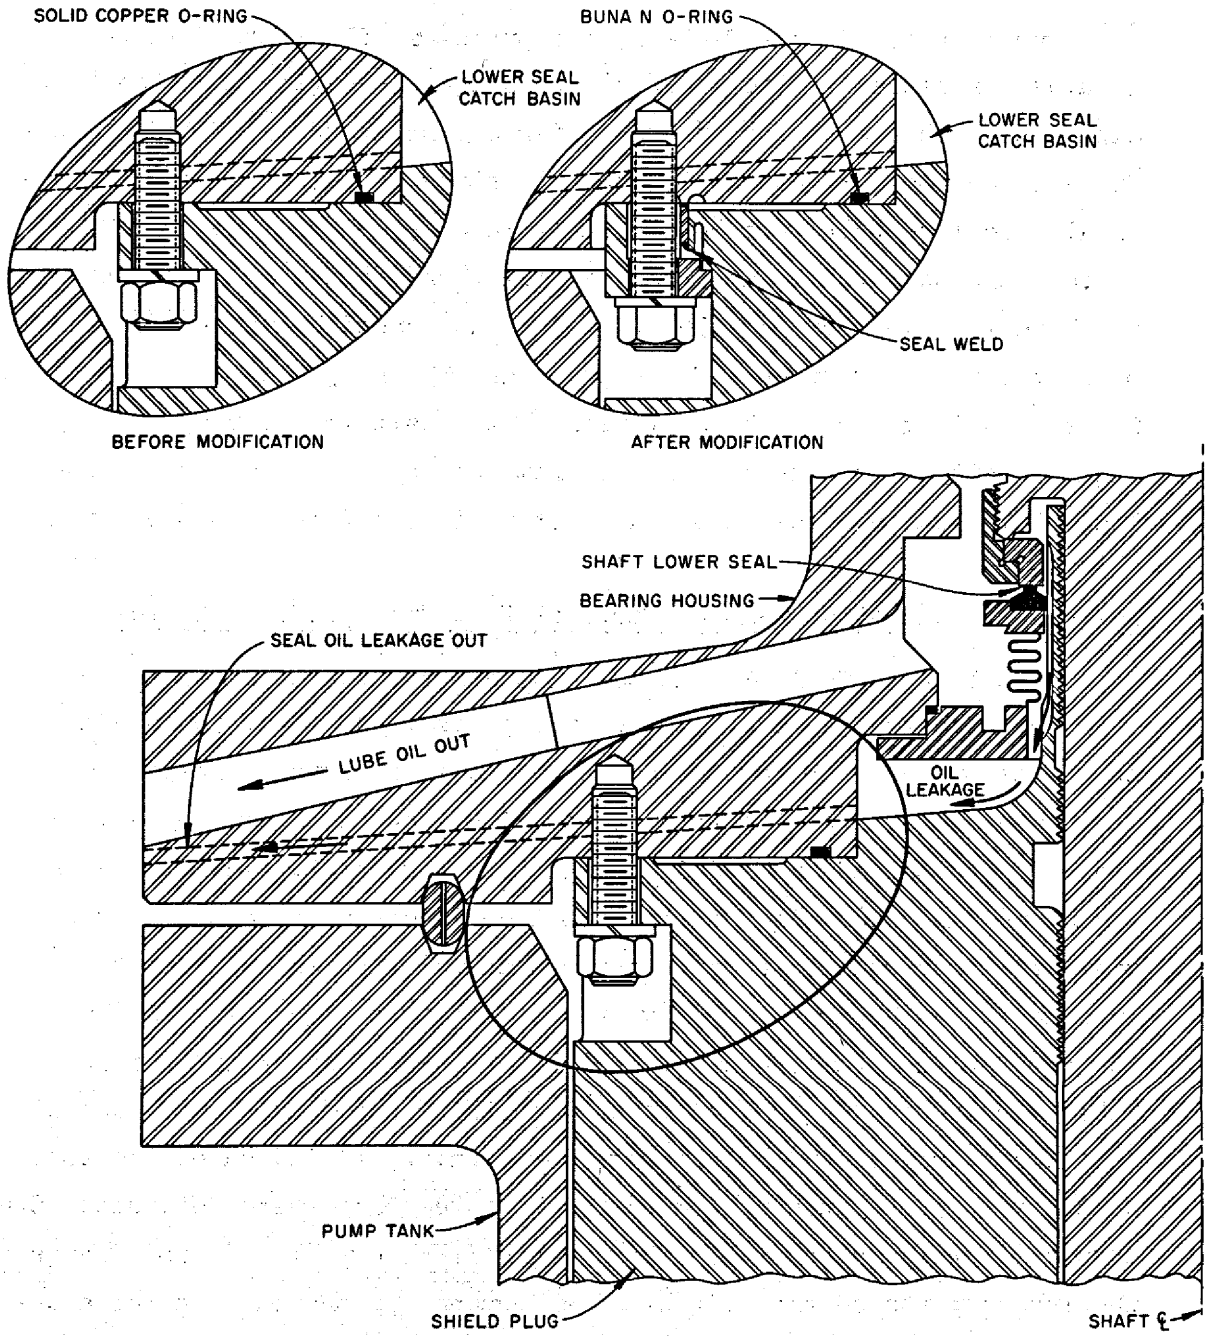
Cross Sections of Catch Basin Region of Rotary Element Before and After Modification to Seal the Oil Leak Passage Between Shield Plug and Bearing Housing.
